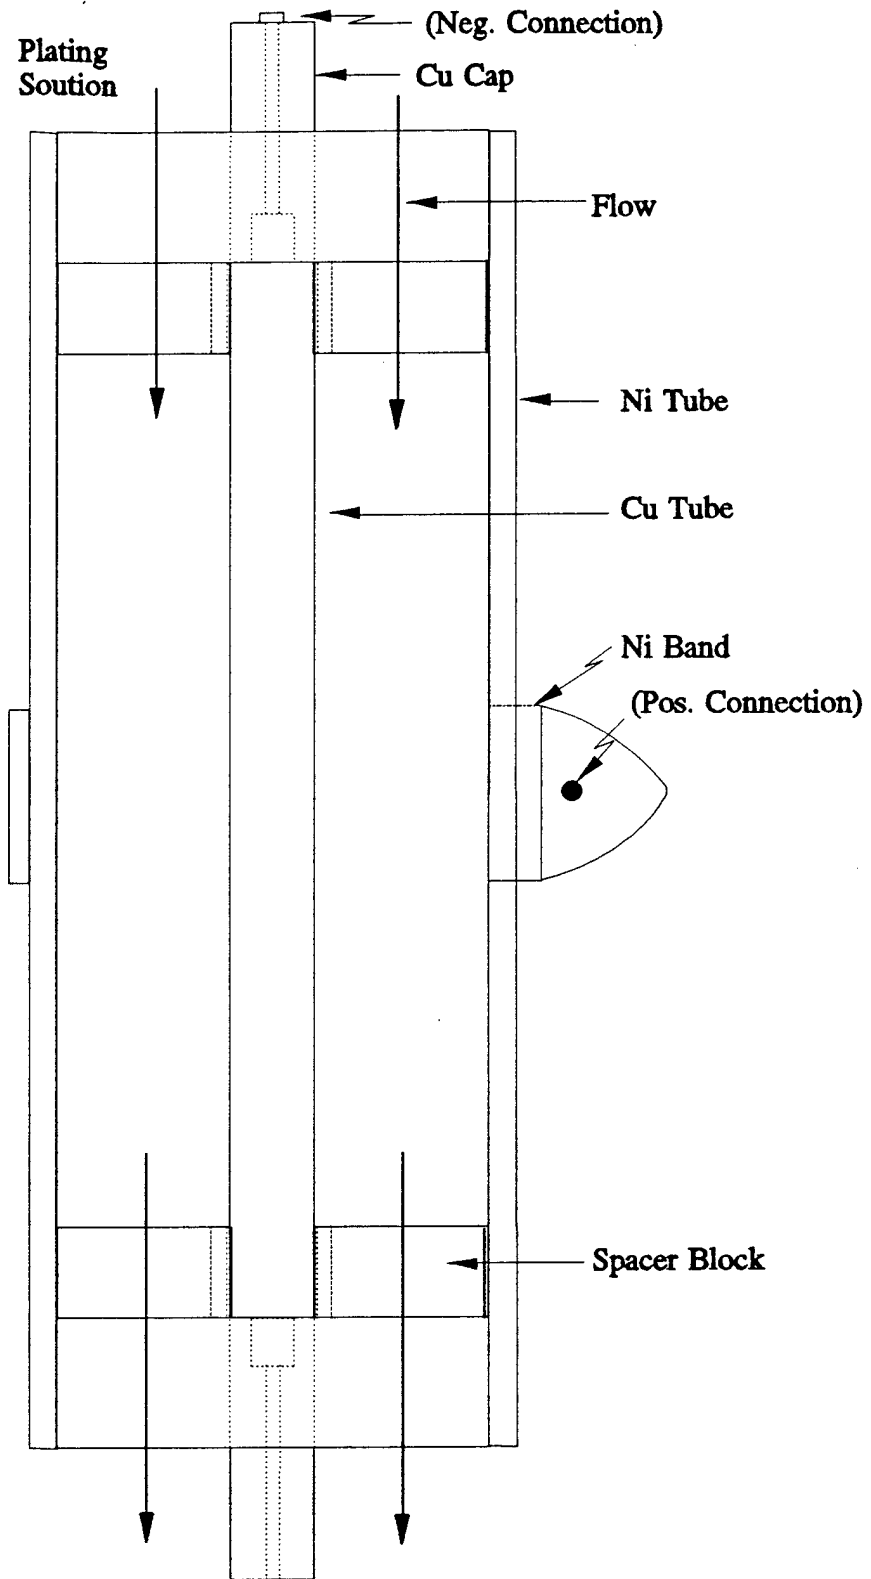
Cross section of copper tube-cathode assembly inserted into nickel anode fixture used to produce the continuous, cylindrical geometry shielding material.
